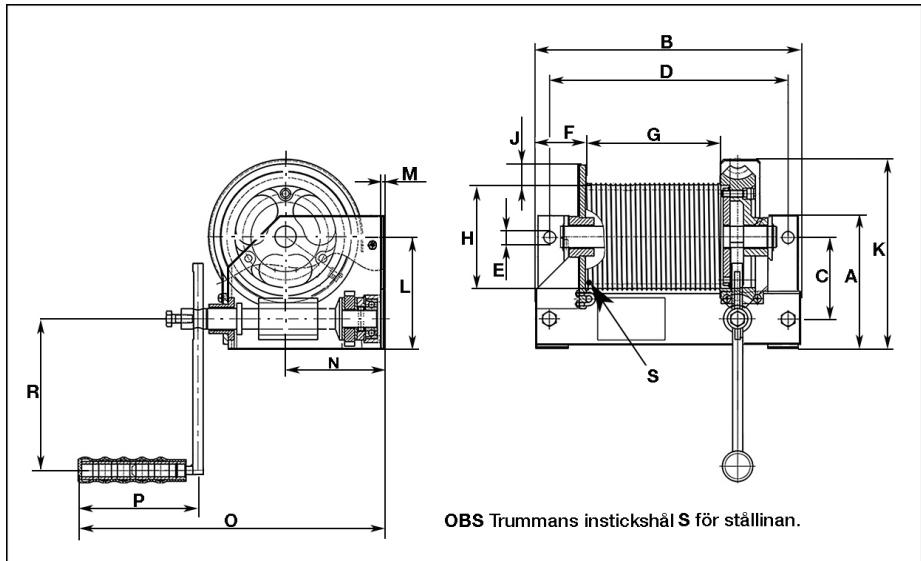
Dimension sketch with the inlet hole S for the wire rope
